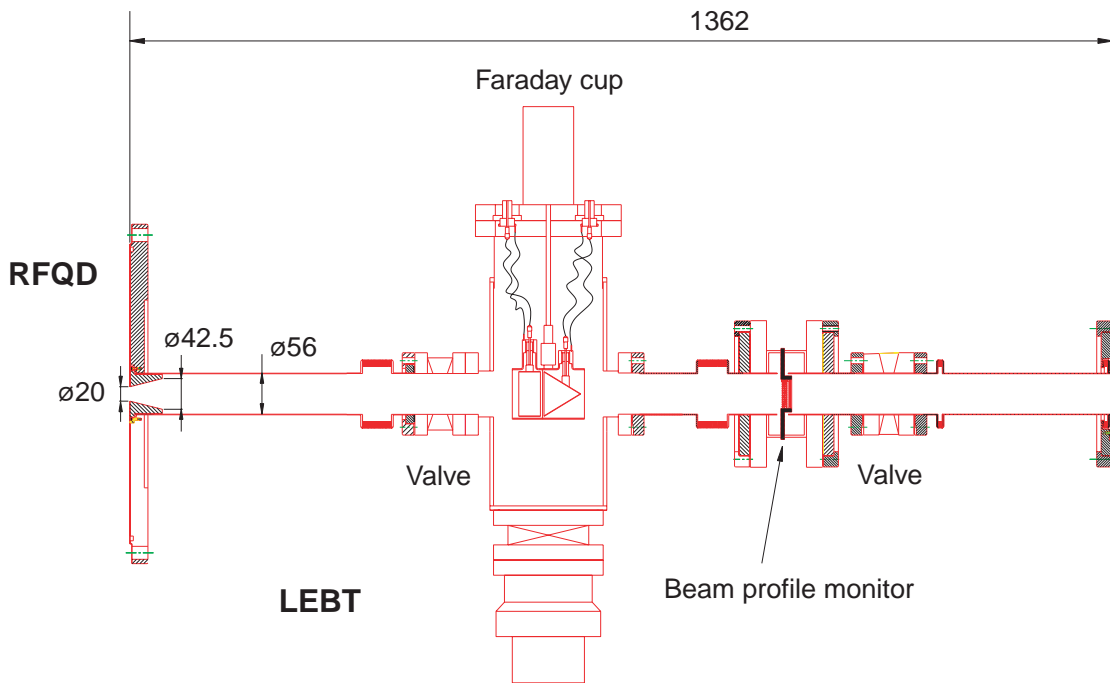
Details of Low Energy Beam Transport (LEBT) section.
